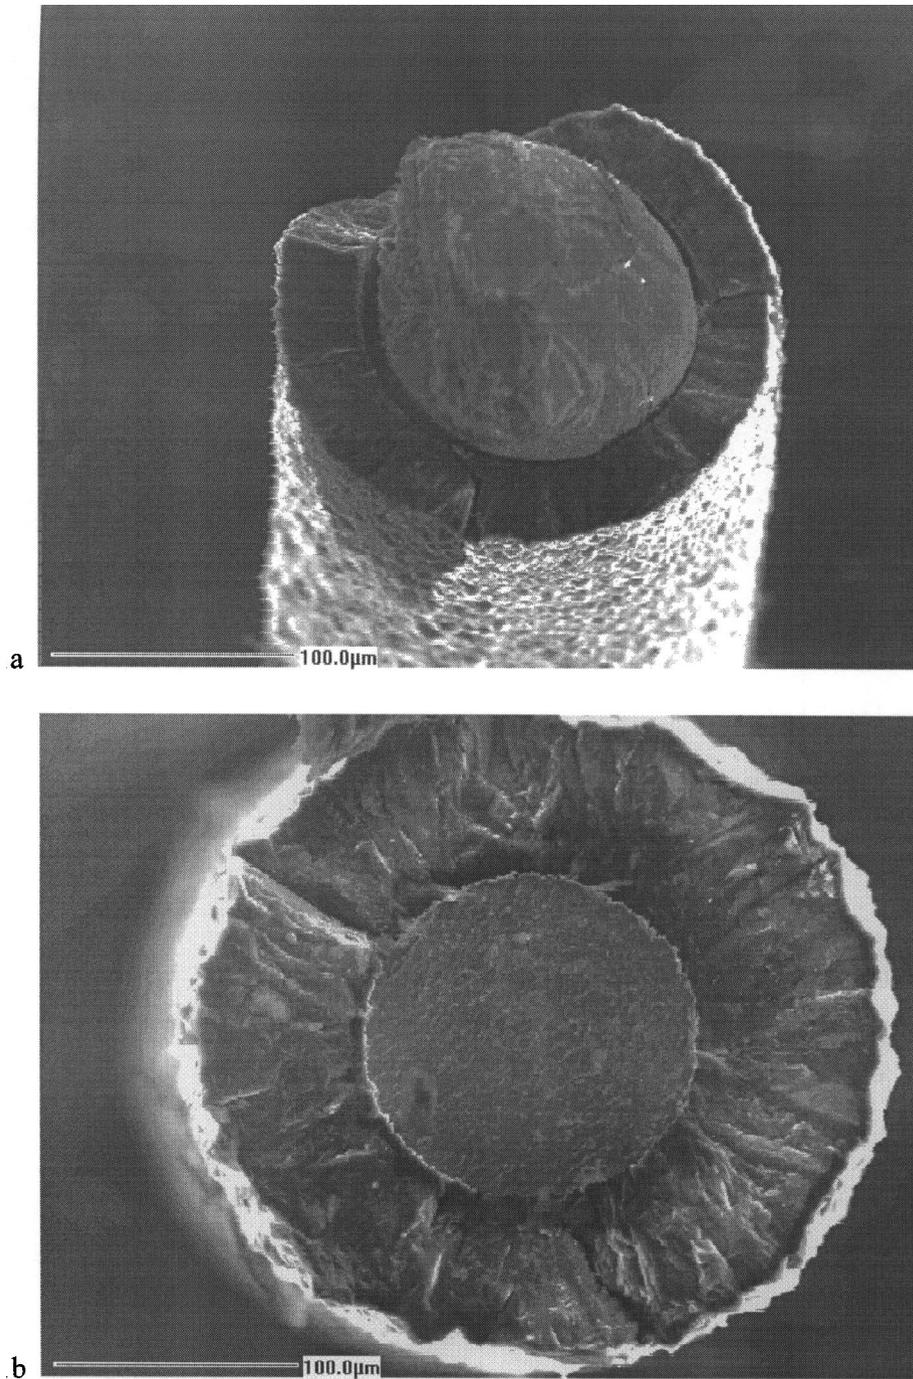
(a) Fracture surface of R-type diamond-coated thermocouples showing debonding between the wire core and diamond coat. (b) Fracture surface of G-type diamond-coated thermocouple showing no debonding between the wire core and the diamond coat.
